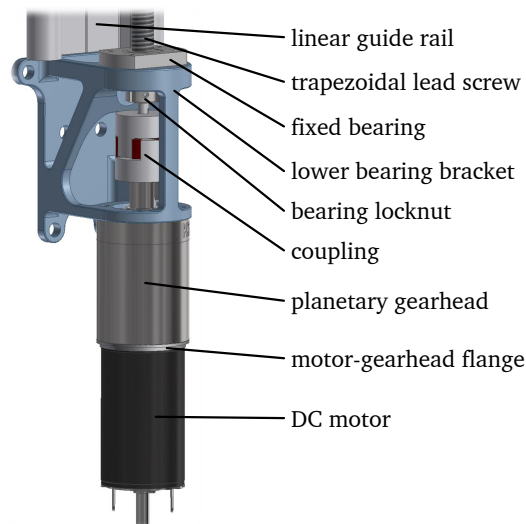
CAD model of lower bearing bracket including motor-gearhead assembly and coupling
